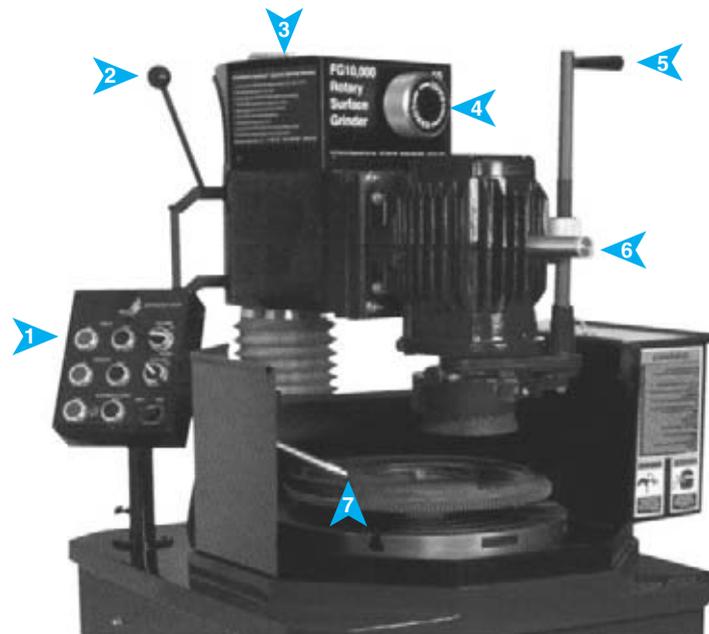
A flywheel grinder rotates the flywheel as a spinning stone is lowered onto the surface. Various styles of flywheels, including stepped ones (inset), can be resurfaced using this machine. (Courtesy of Van Norman Equipment Co., Inc.)
